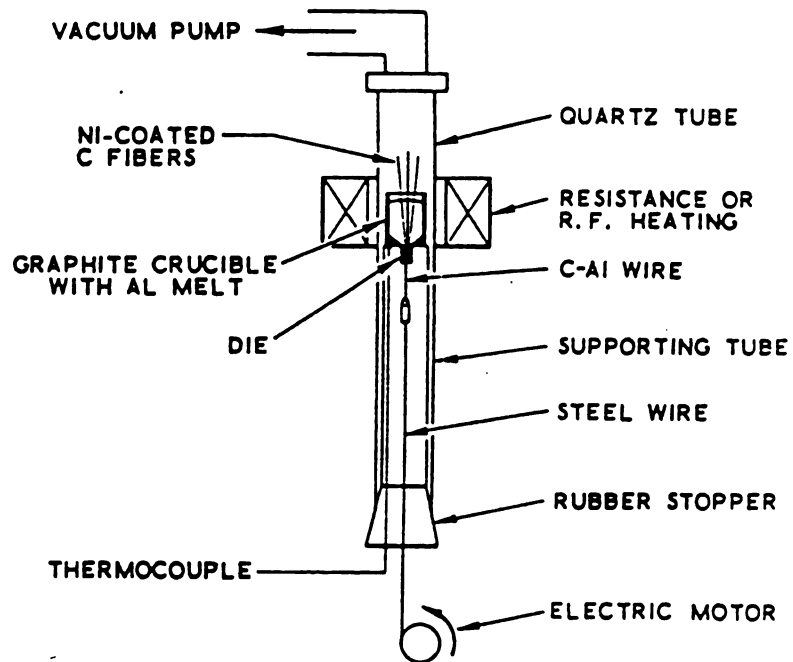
Wire drawing apparatus for producing continuously cast aluminum-carbon composite [25].
